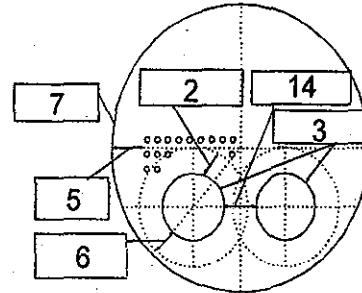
C - SOME OF THE BREATHING SPACES IN BOILERS WITH MORE THAN ONE FURNACE
